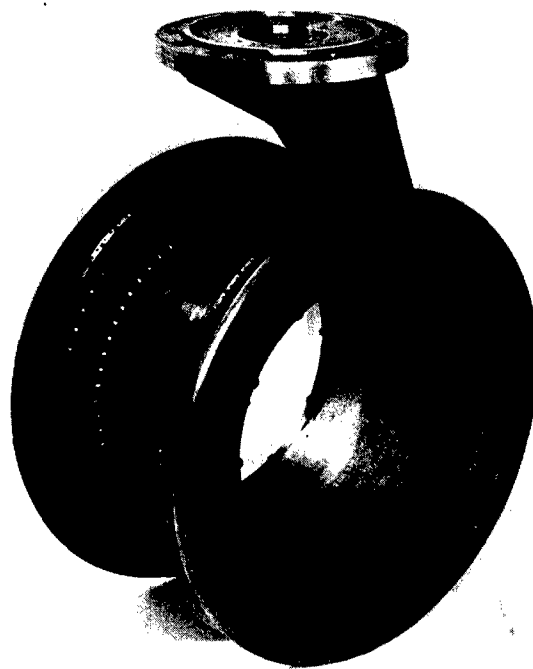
Assembly of spool, end flanges, and gooseneck for HP-3DS transducer.
